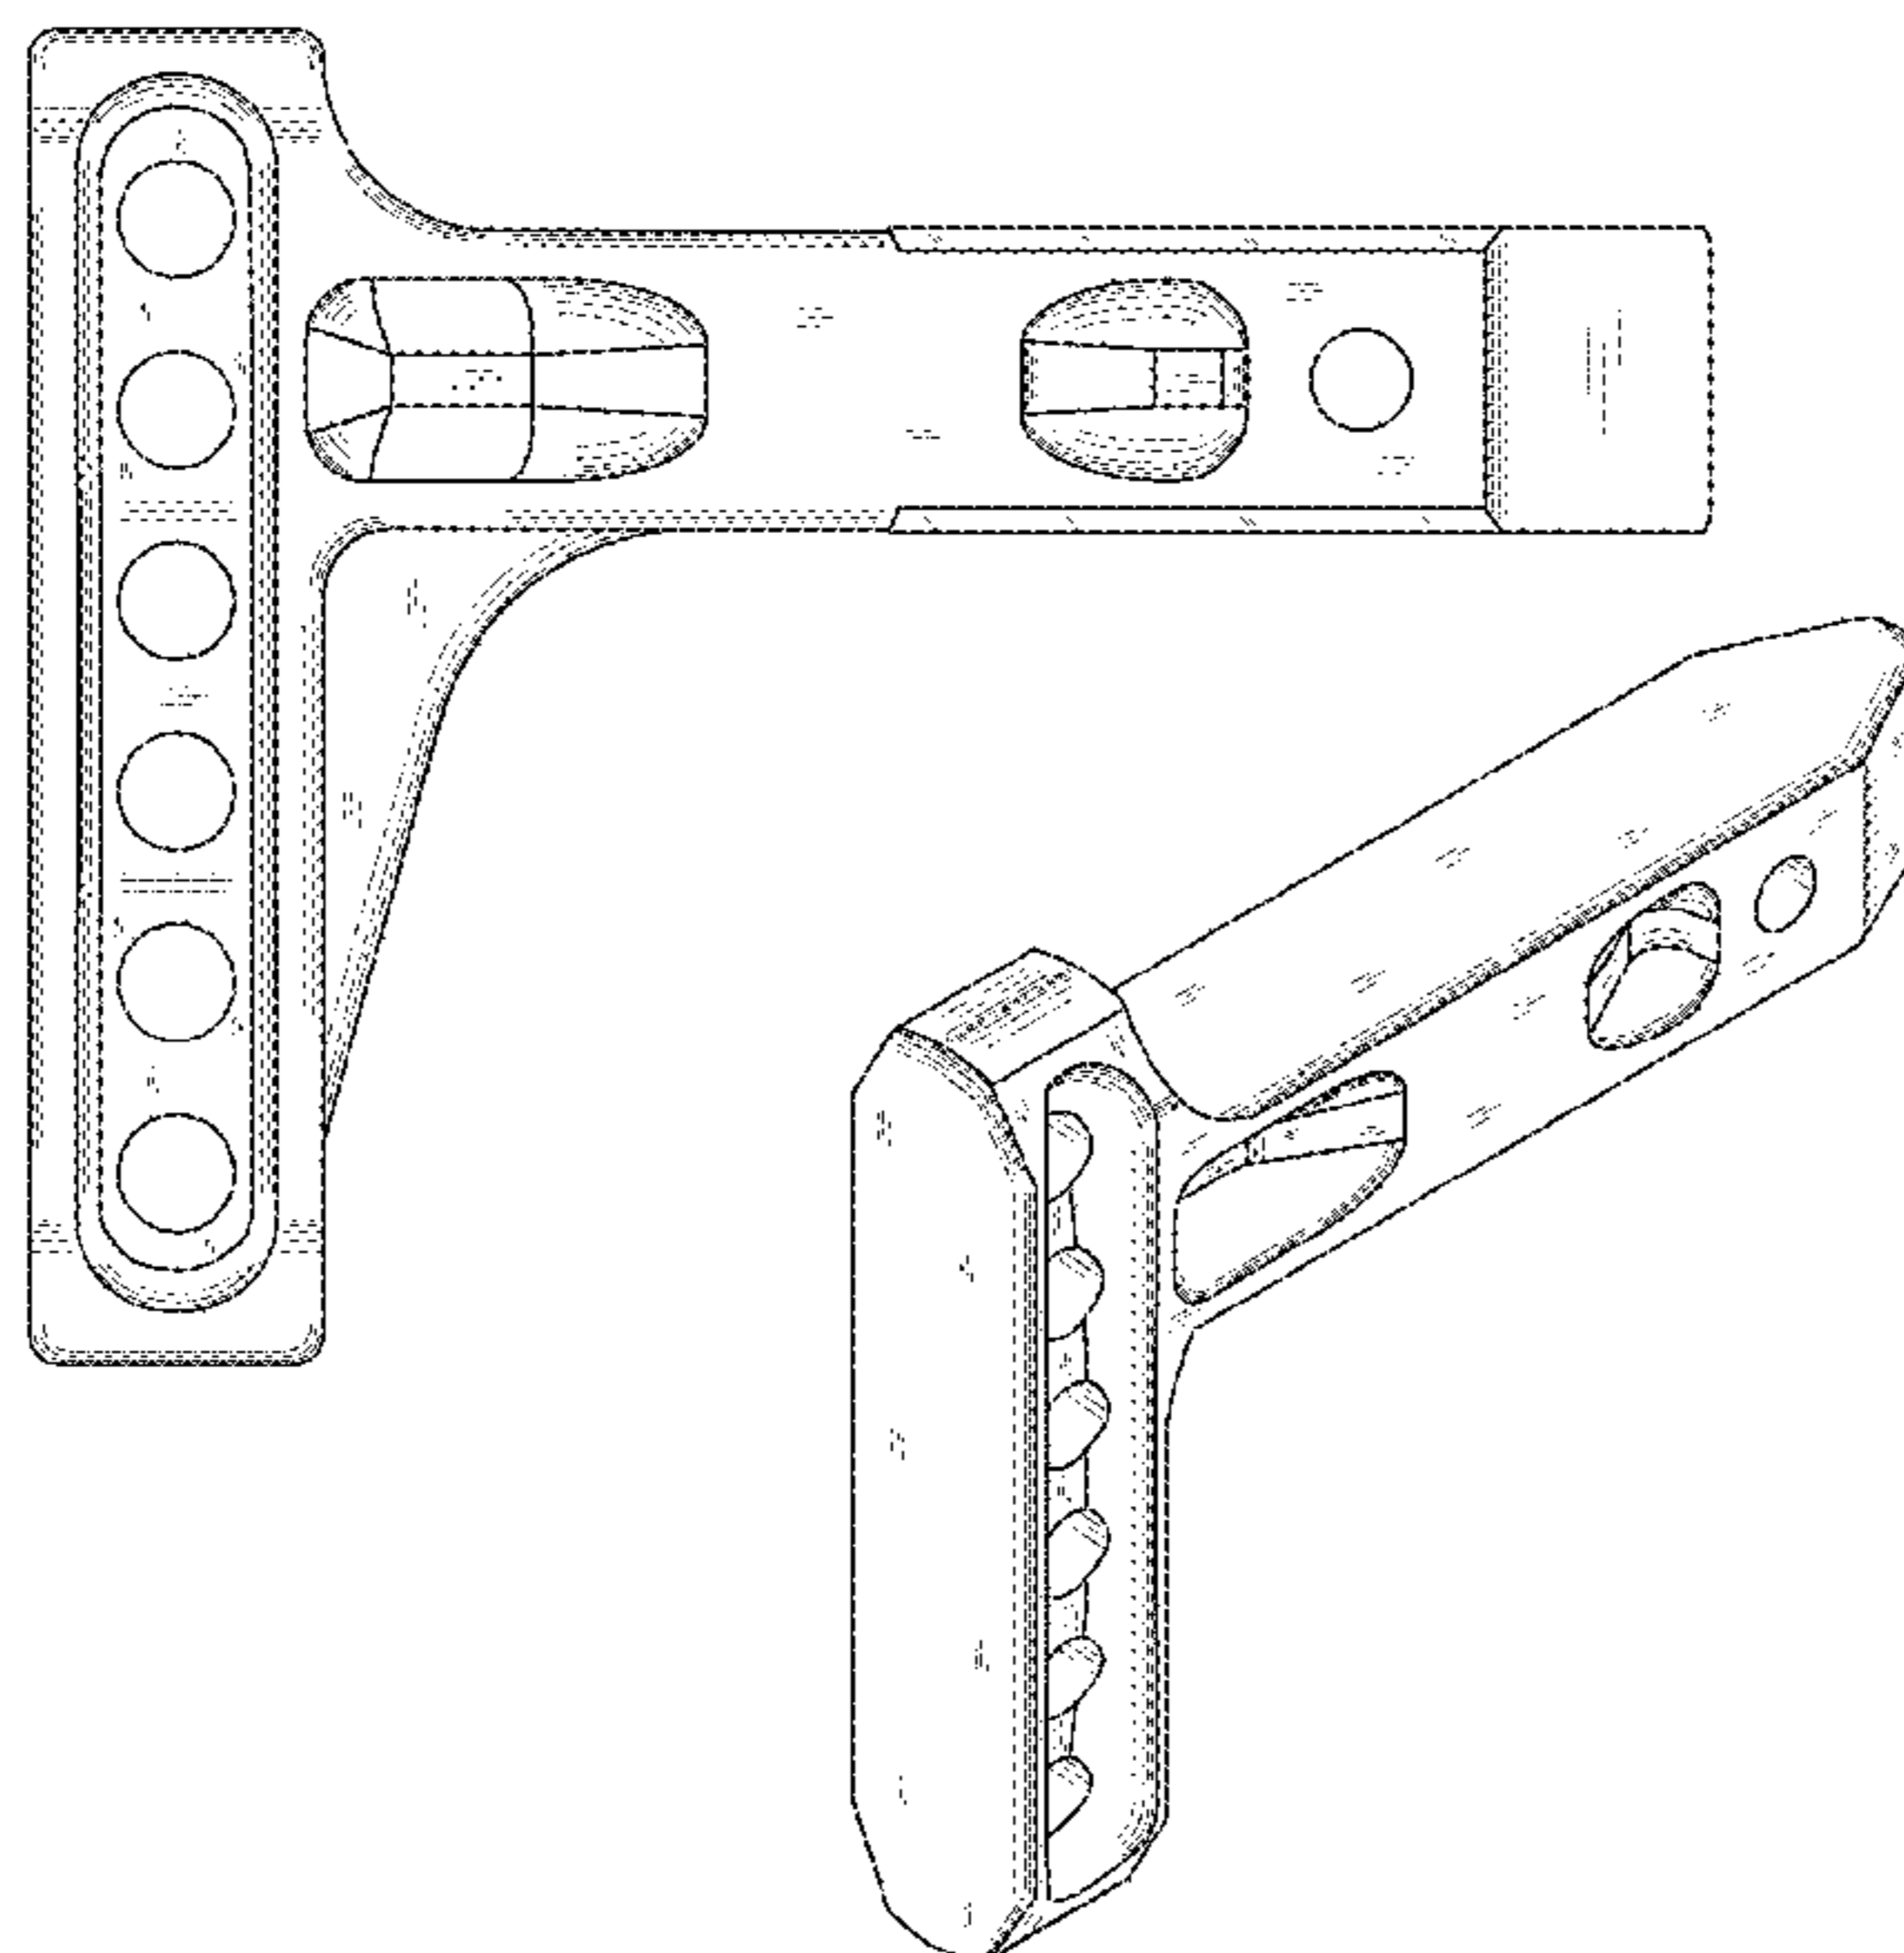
is a top, rear, right side perspective view of a hitch shank showing my new design;
